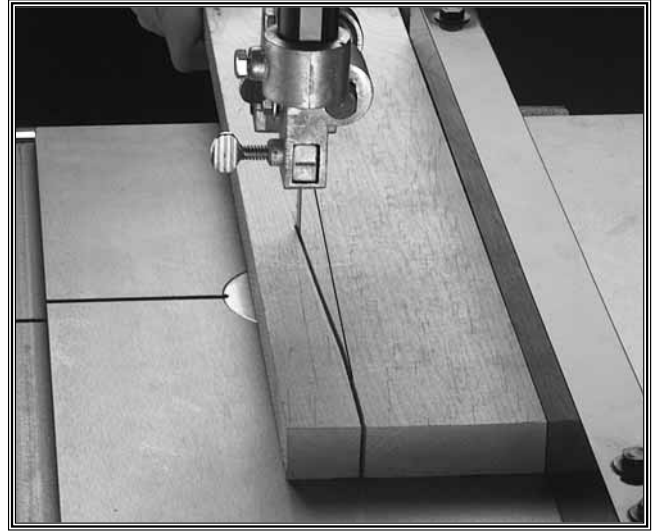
Typical bandsaw with excessive blade lead during a rip cut.
